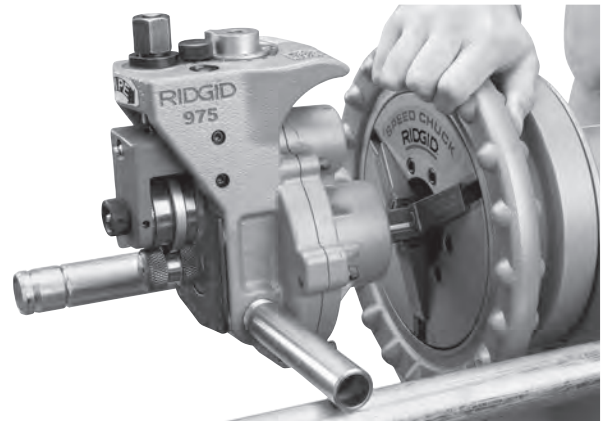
Mounting 975 Combo Roll Groover Into 300 Power Drive Chuck
